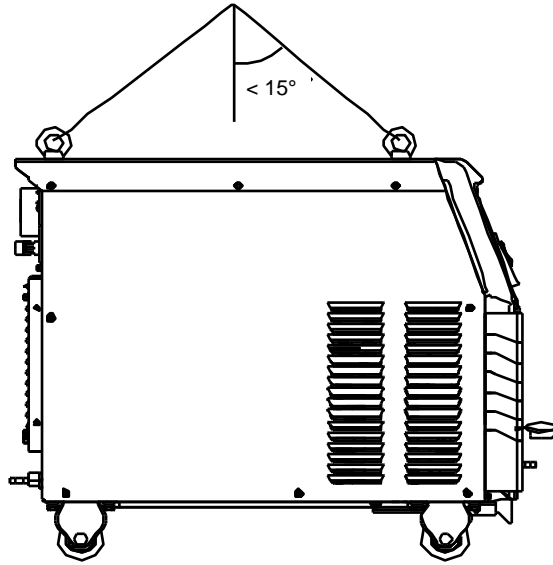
Schematic diagram of moving the welder using a crane
